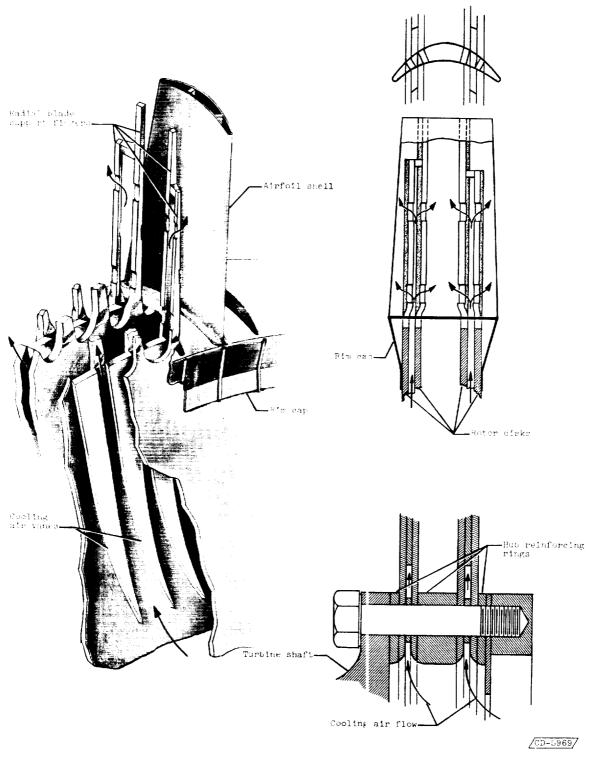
Schematic drawing of proposed lightwe ght turbine assembly.
